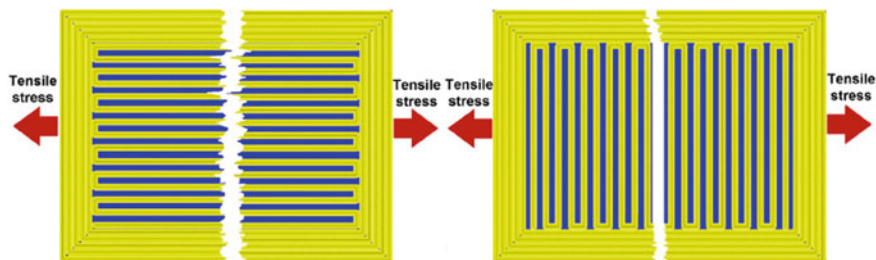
Fracture mechanism for raster angle of 0° and 90° [48]
